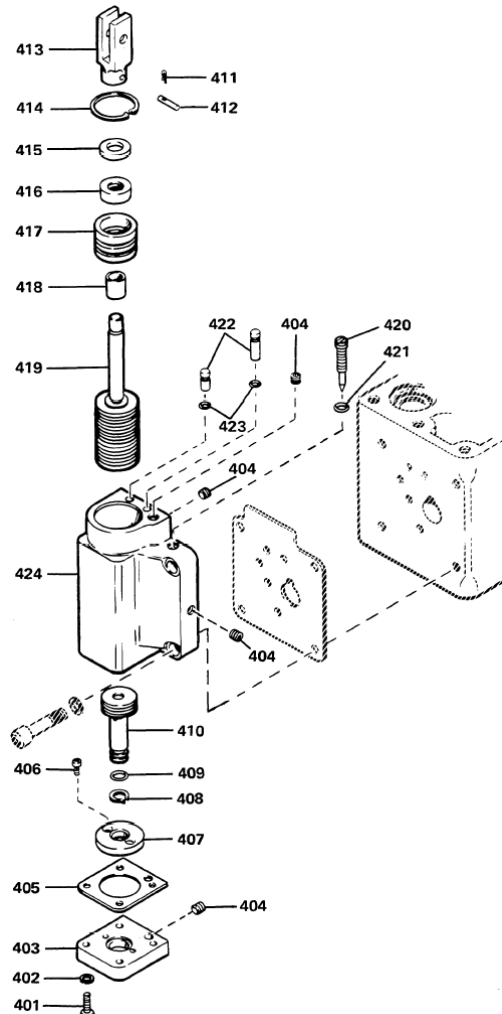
Exploded View of 17 ft-lb (23 J) Differential Power Cylinder
